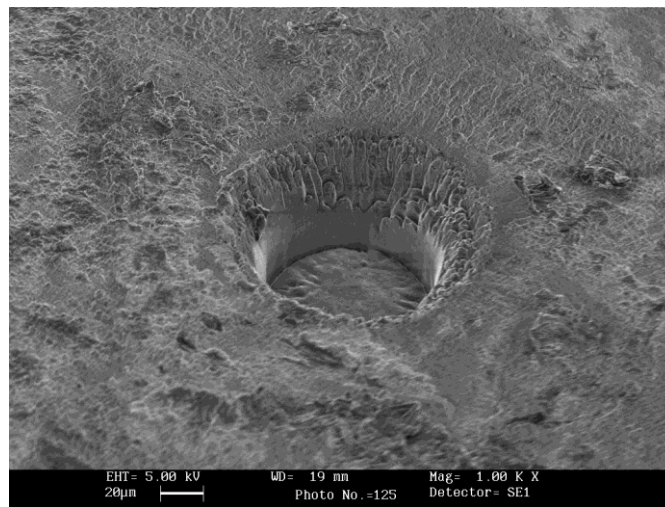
Excimer laser machined circular hole machined into Al_2O_3 . 1080 pulses with attenuator setting of 0.7.
